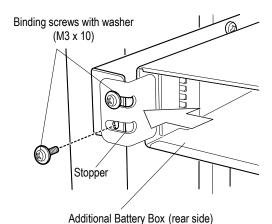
Fixing the Rear Side of the Additional Battery Box (RK40 rack frame)
